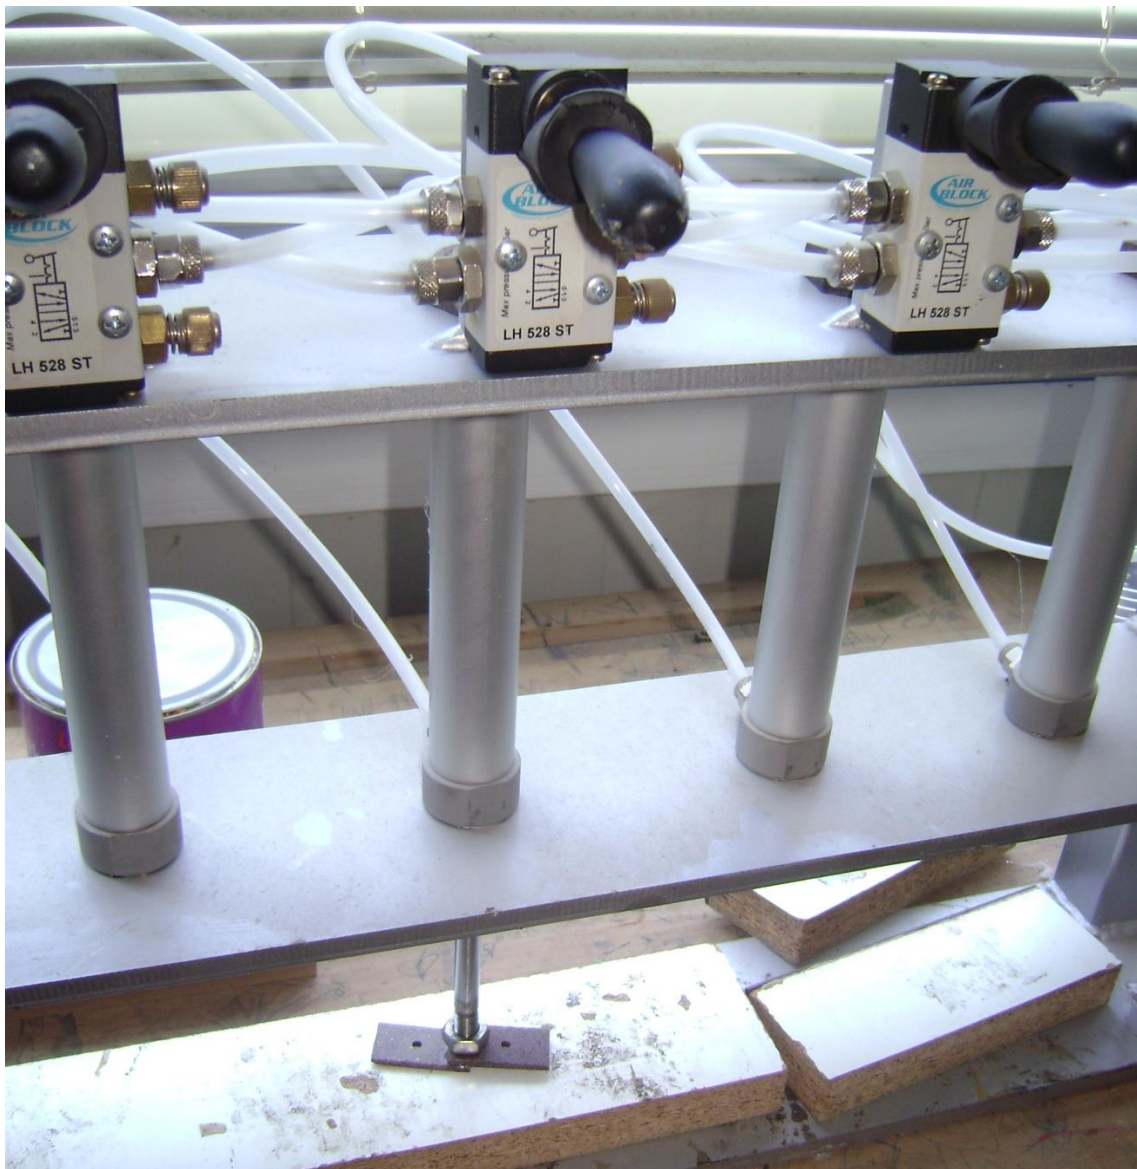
Pneumatic clamps applying uniform pressure to a lap joint specimen.
